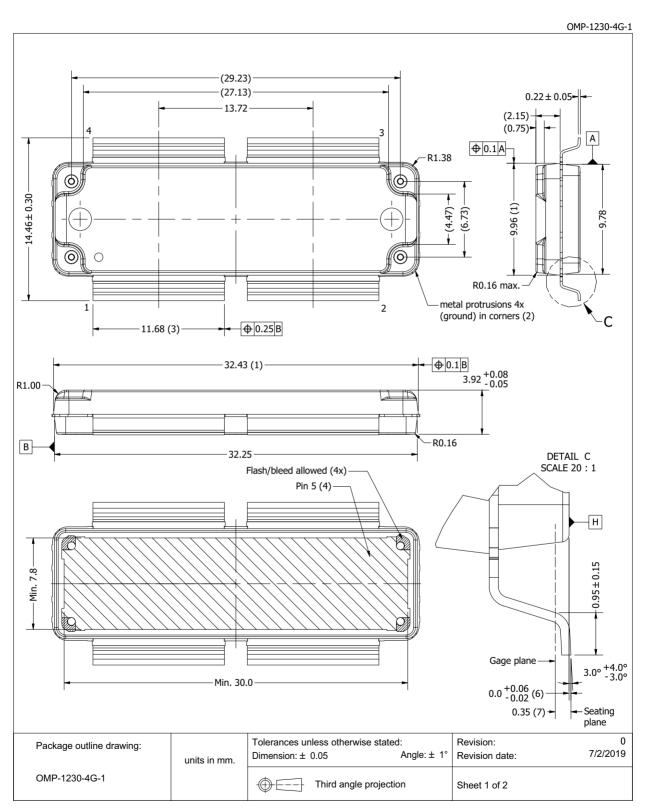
Package outline OMP-1230-4G-1 (sheet 1 of 2)
